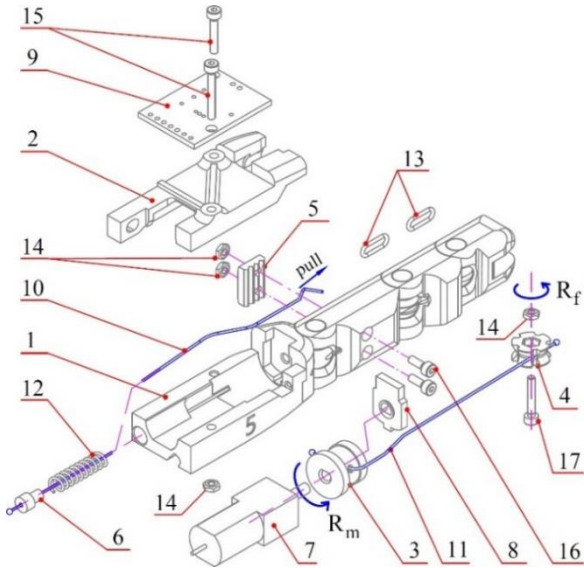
Main components of a finger 1- finger body; 2 – lid; 3- driving drum; 4 - tension roller; 5 - pressing cap; 6 - moving spring cap; 7 – gear motor; 8 – resistive potentiometer; 9 - printed circuit board (PCB); 10 and 11 – threads; 12 – spring; 13 – rubber bands; 14 to 17 – fasteners. (from [3]).
